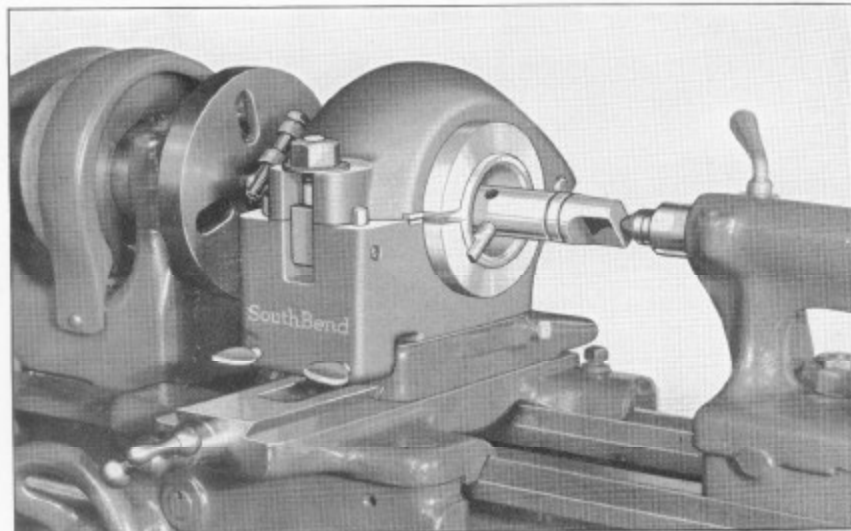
Boring a bronze backed bearing in special fixture mounted on lathe carriage.
